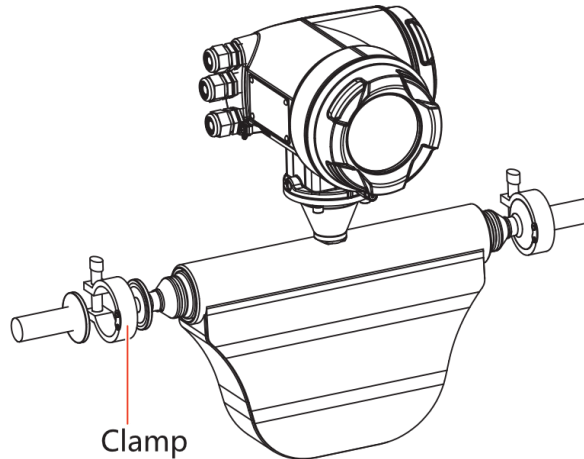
Clamp Connection (Taking the integrated type as an example)
